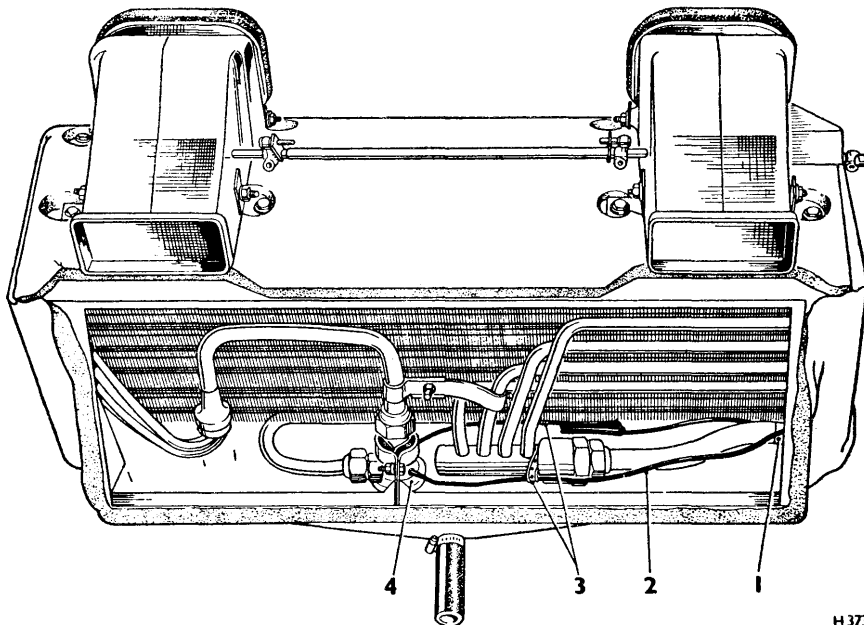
POSITION OF EXPANSION VALVE IN EVAPORATOR BOX (Early cars)
